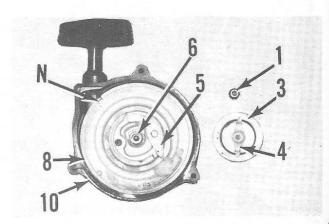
Partially disassembled view of manual starter assembly typical of the type used on KLF models.
